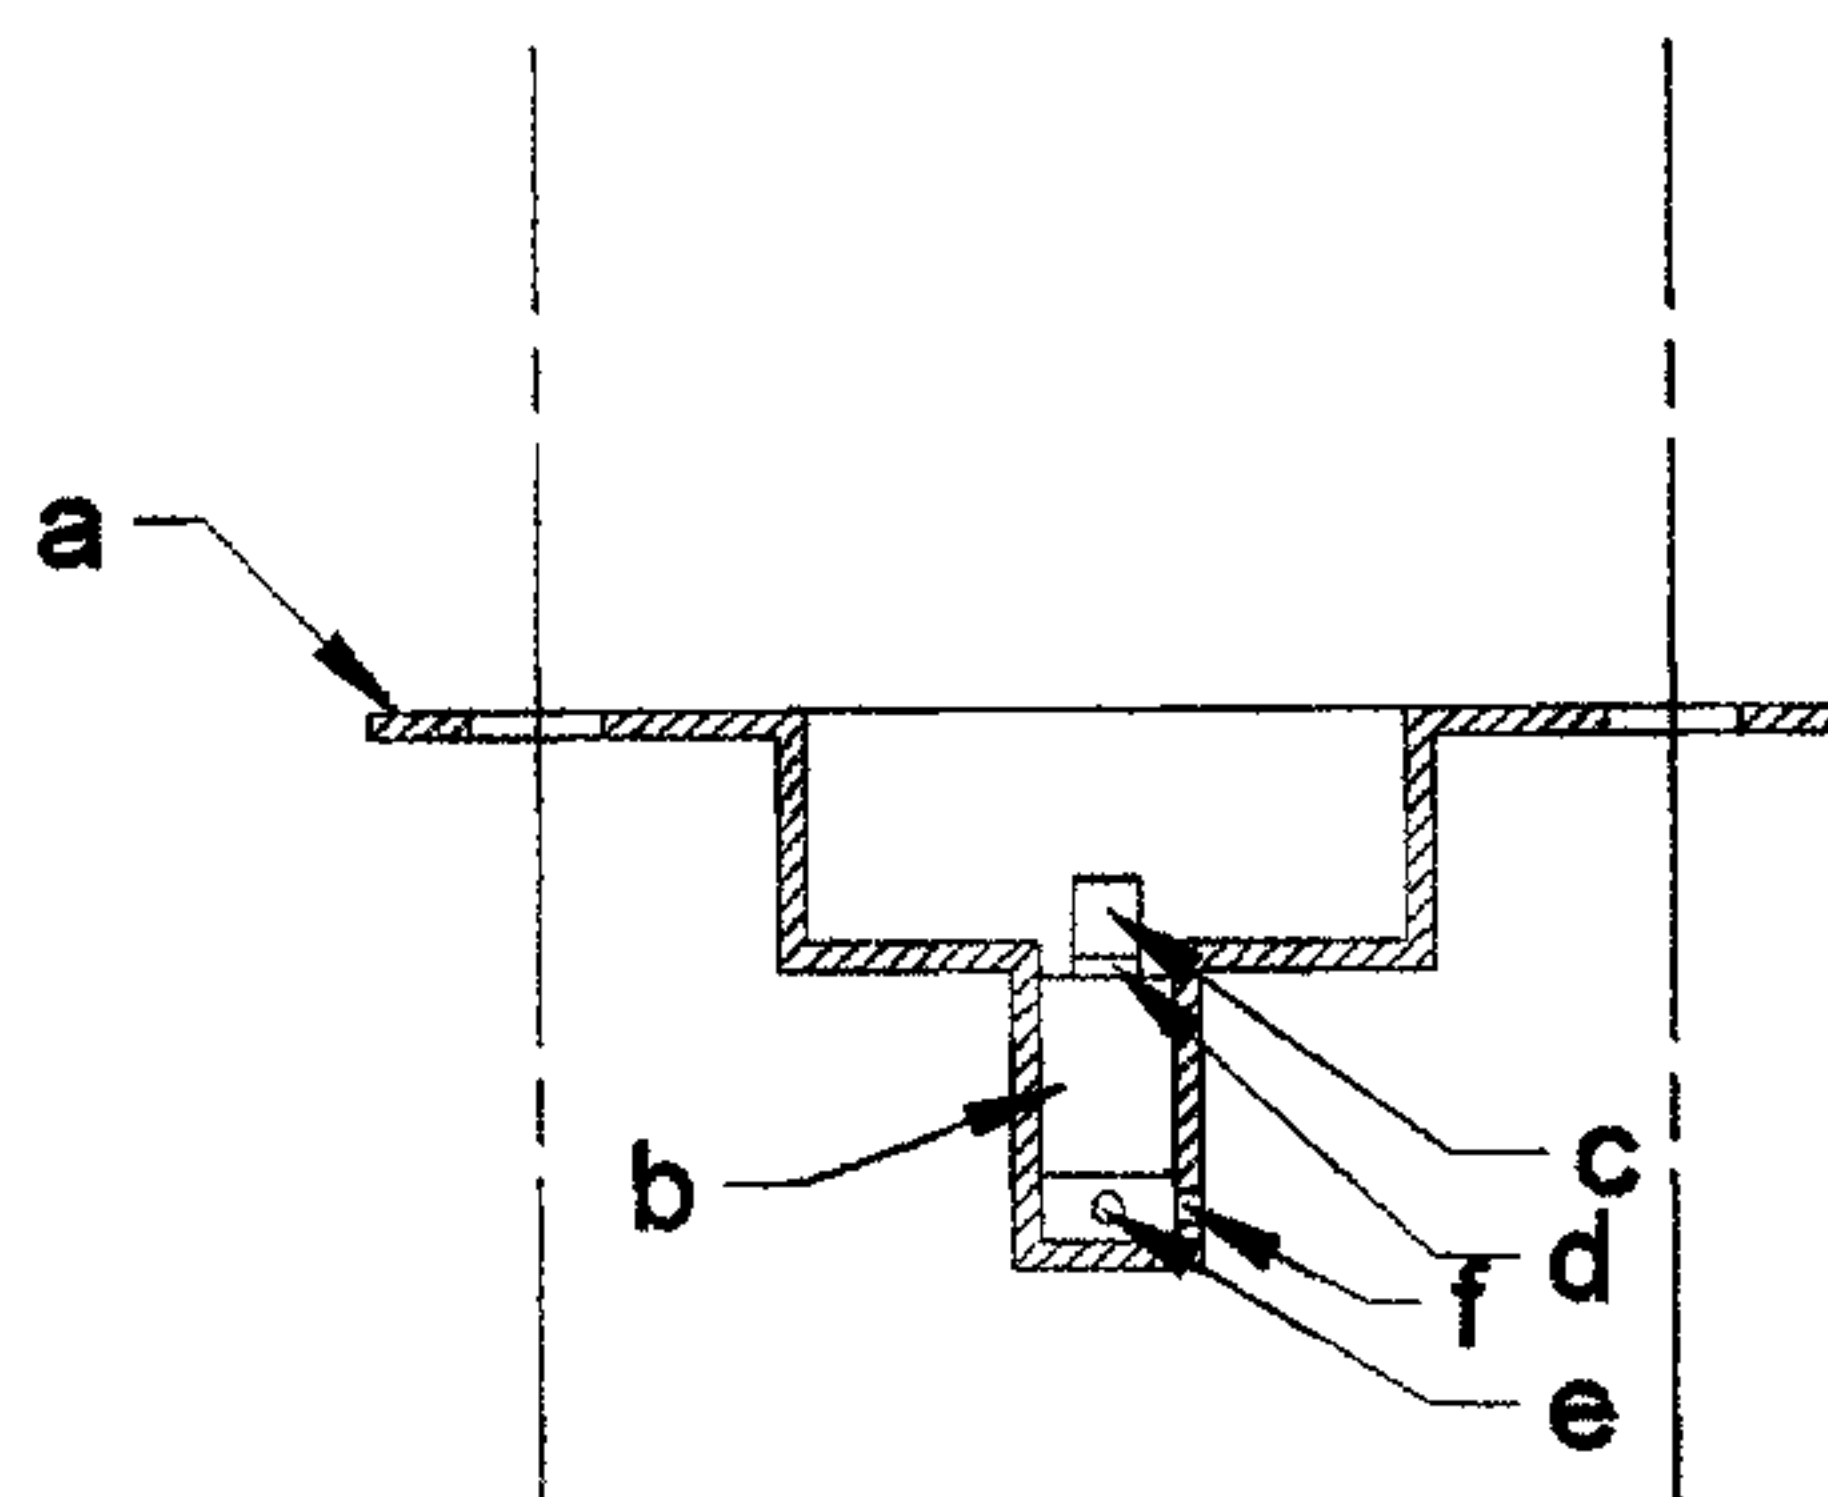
ALTERNATIVE FRONT SECTIONAL VIEW
